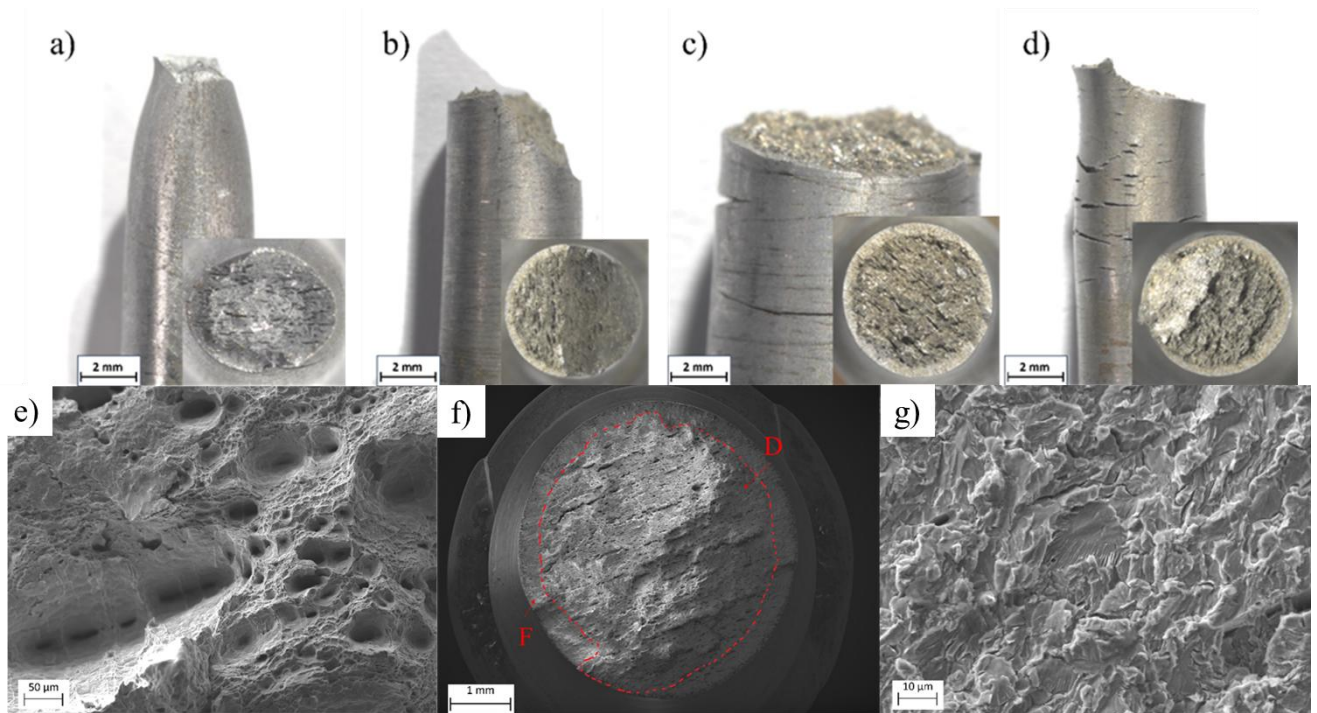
Fracture propagation and fracture surface for specimens tested in air (a) and specimens in situ charged (b–d). For all samples, fracture occurred in the BM. SEM images of the fracture surface that developed in the BM of a charged specimen (f) reveal a markedly ductile (D) and brittle (F) fracture morphology. Magnified views of the ductile and brittle fracture modes are shown in (e) and (g), respectively.
